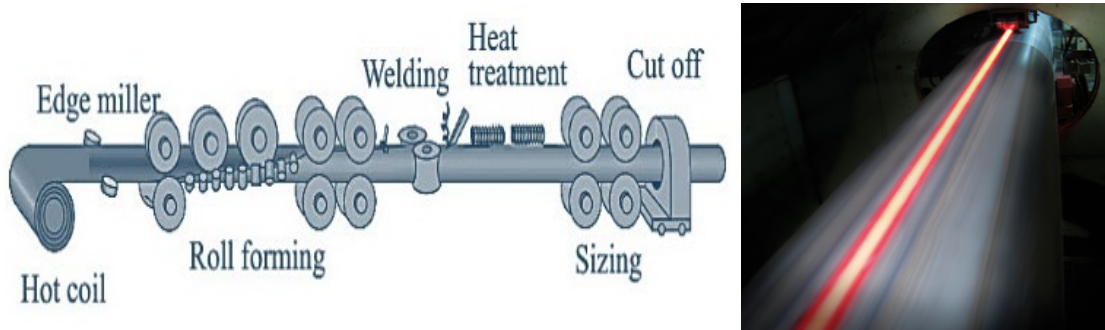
Schematic representation of continuous pipe welding operation [4].
